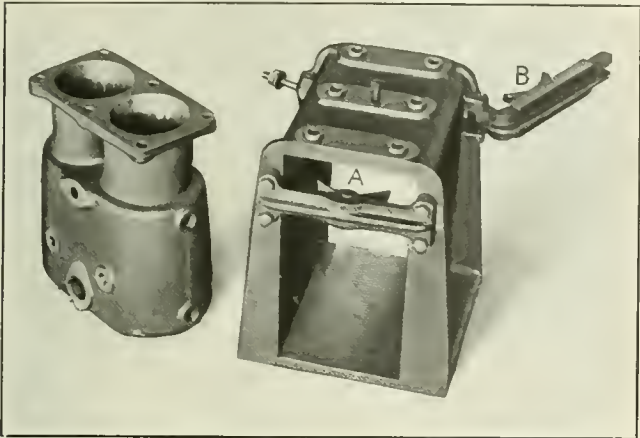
Jig for Drilling the Six Holes in the Flanges of the Cylinders which are used as Locating Holes in the Subsequent Operations
